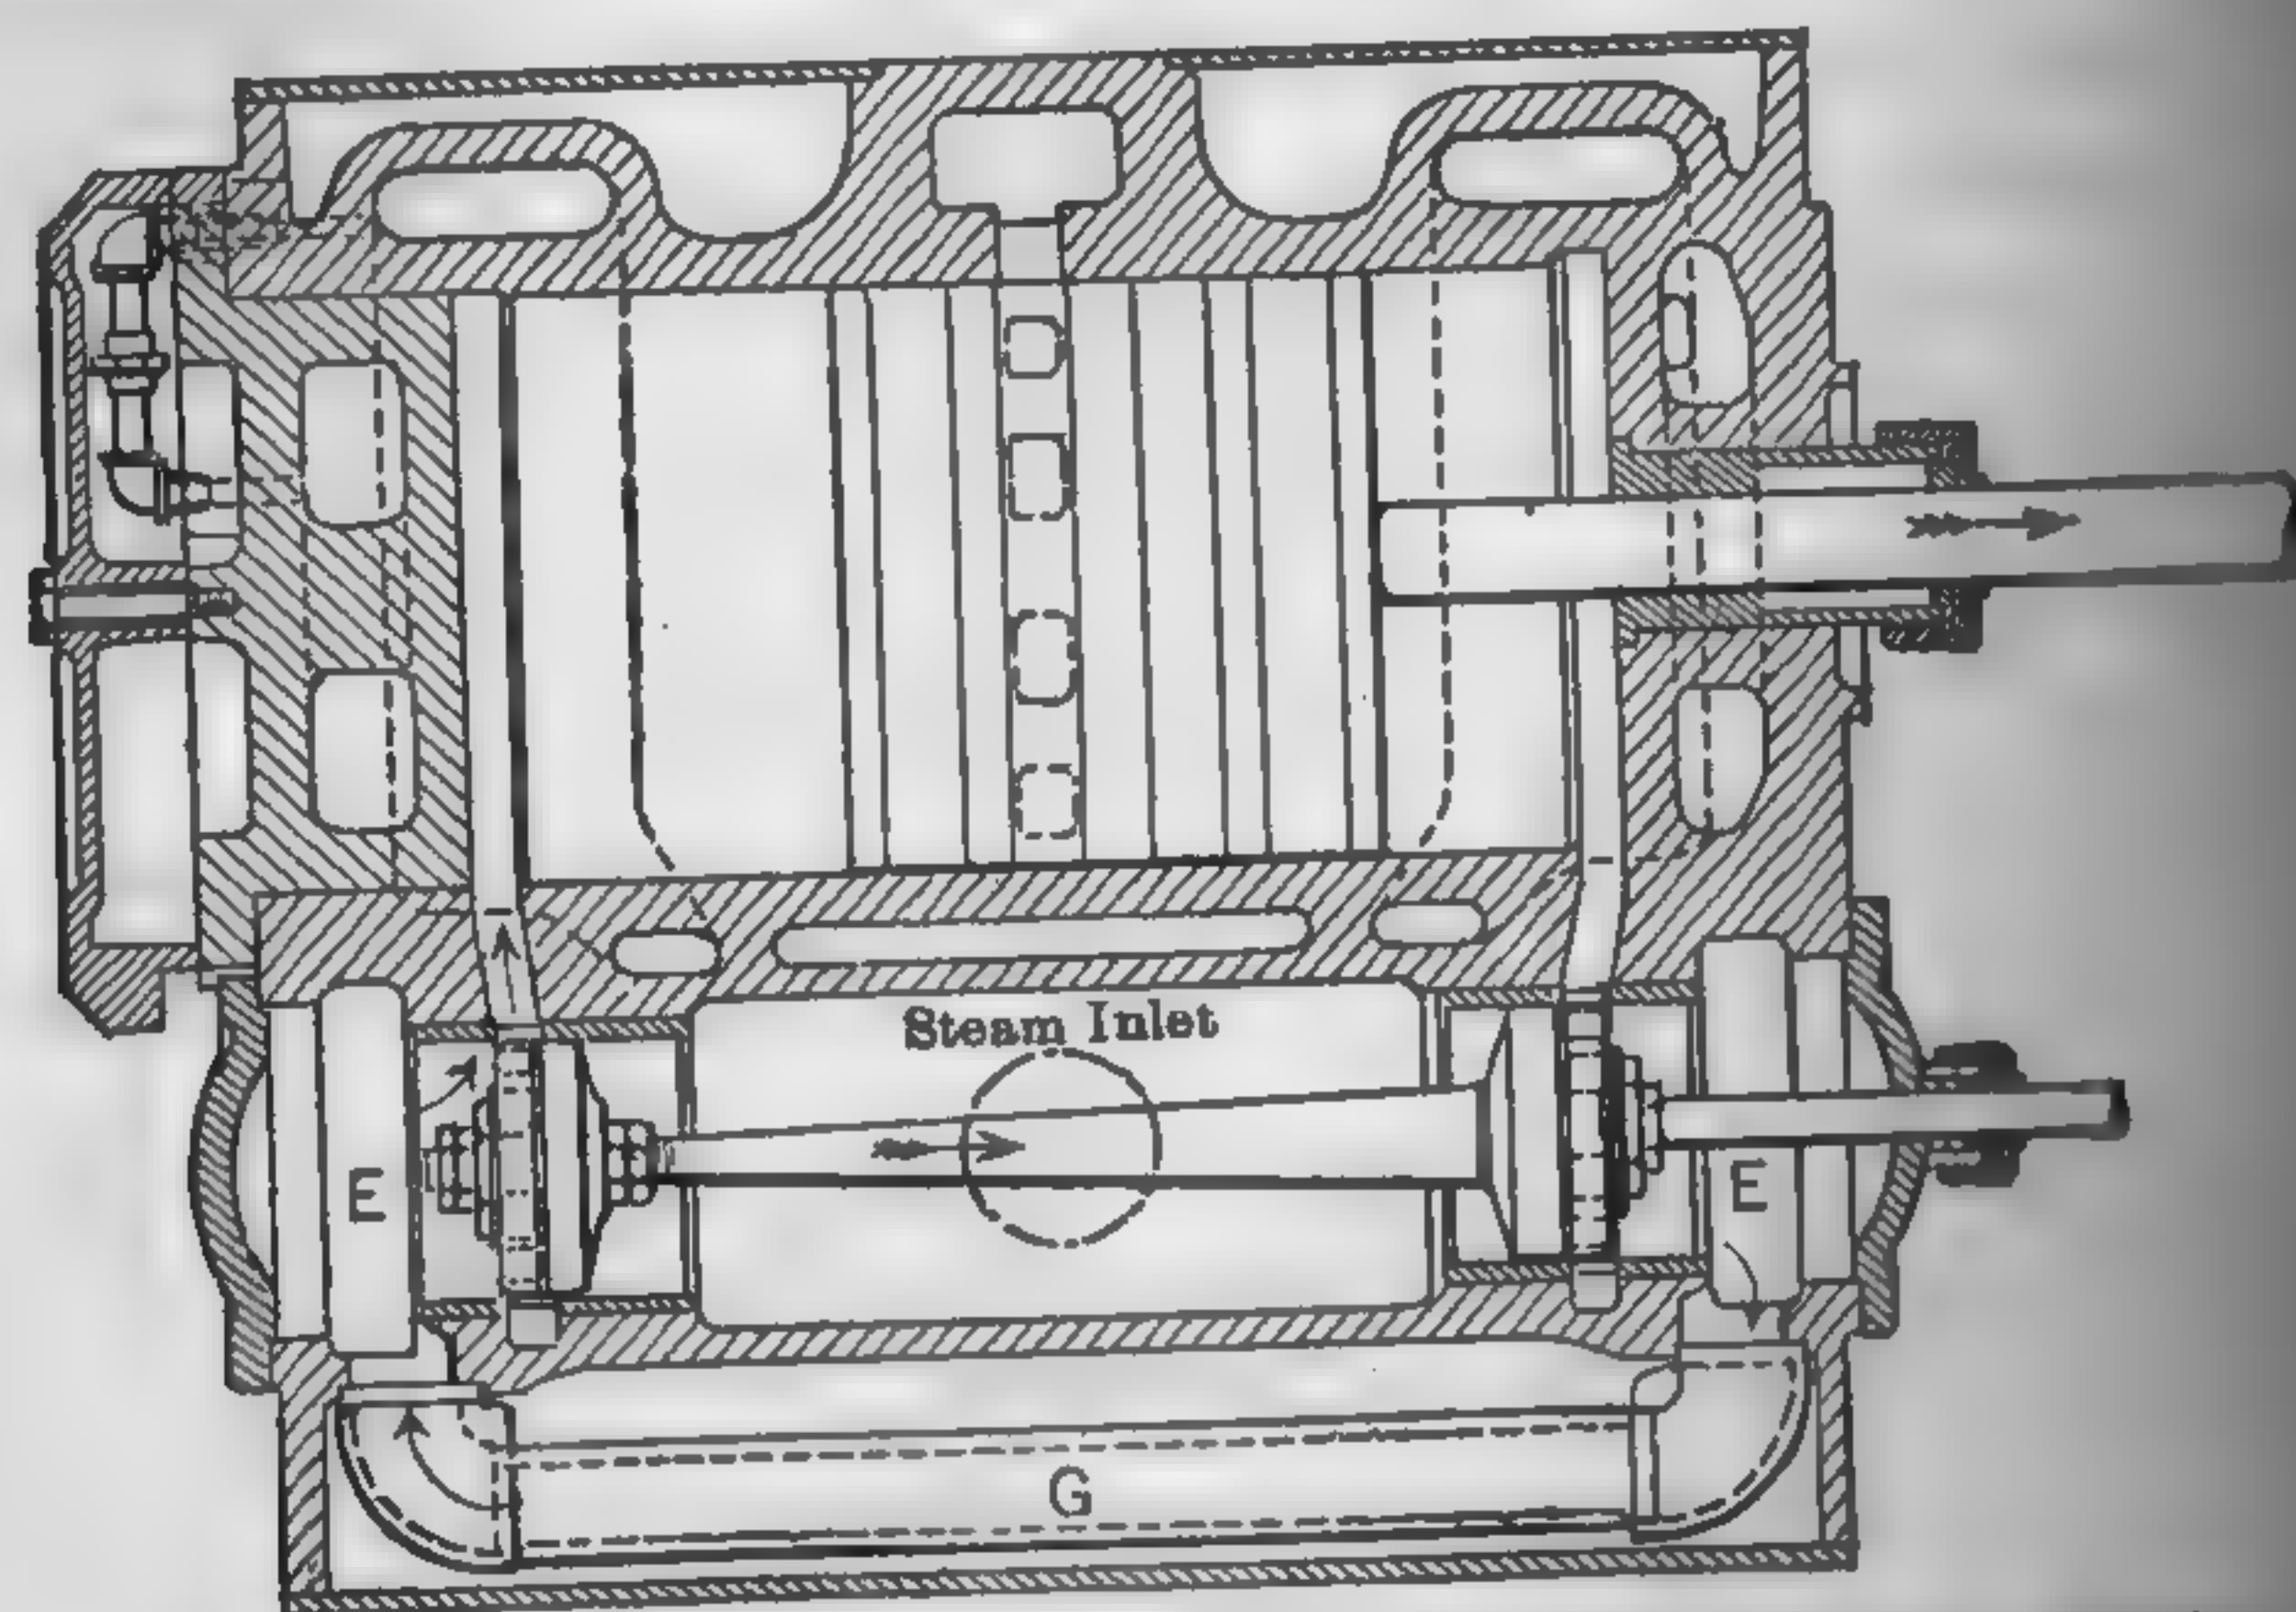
Harrisburgh "Dual-Clearance" Uniflow Engine.
